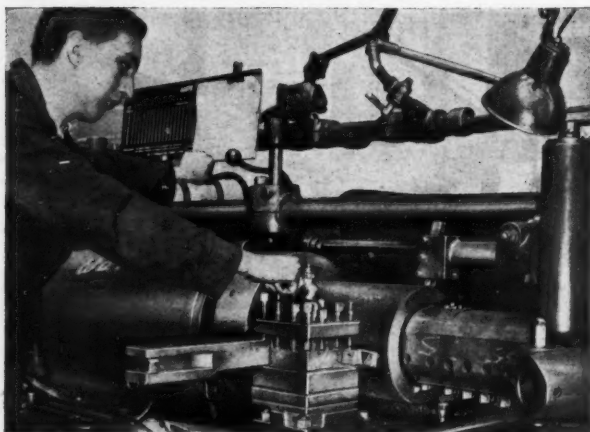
A Ward No. 8 turret lathe set up for machining the eccentric sleeves that house the spindles on Ryder No. 8 Verticalautos. The centrifugal cast iron component is 10½ in. long, and a series of ¼-in. steps is machined in the bore by six tools in the bar at the right, which is piloted in a bush in the machine spindle. Simultaneously, the exterior is turned with a knee tool, and a recess is machined by a tool at the rear of the cross slide. All tools are carbide tipped, and machining is performed at a speed of 84 r.p.m. and a feed rate of 68 cuts per in. Subsequently, the part is bored 3-deg. 6-min. taper, to 8.598 in. diameter at the large end
